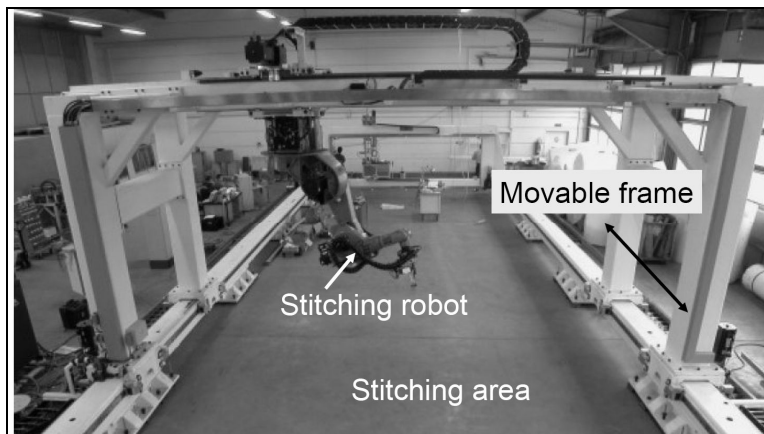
KSL combined robotic controlled and CNC machine [76]
